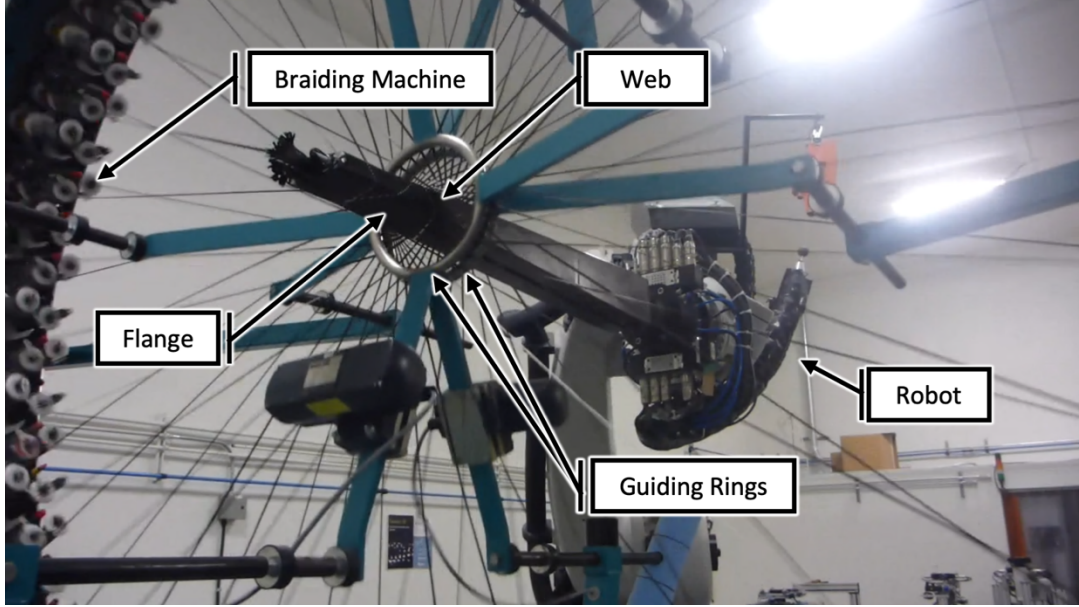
Photograph of a braiding setup. The robot is holding the mandrel through the guiding rings of the braiding machine. The two face groups are denoted flange for the highest dimension and web for the lowest.
